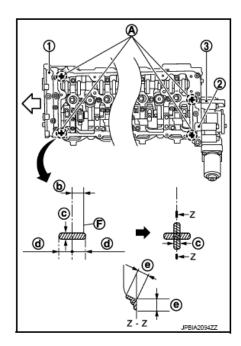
Identifying Sealant Applying Dimension On VVEL Ladder Assembly And Actuator Bracket (Rear)
